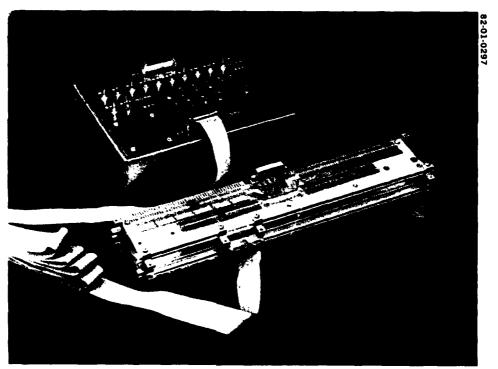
Test Adapter/Test Fixture. The Test Adapter/Test Fixture is the electro-mechanical interface to the DTS-70.
